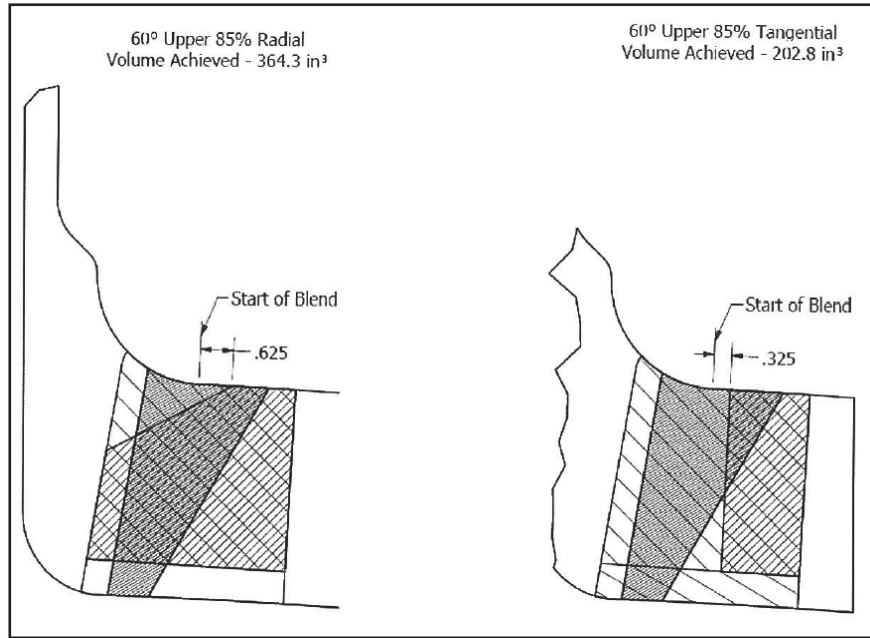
Weld N7-NV, Upper 85% Coverage Achieved
